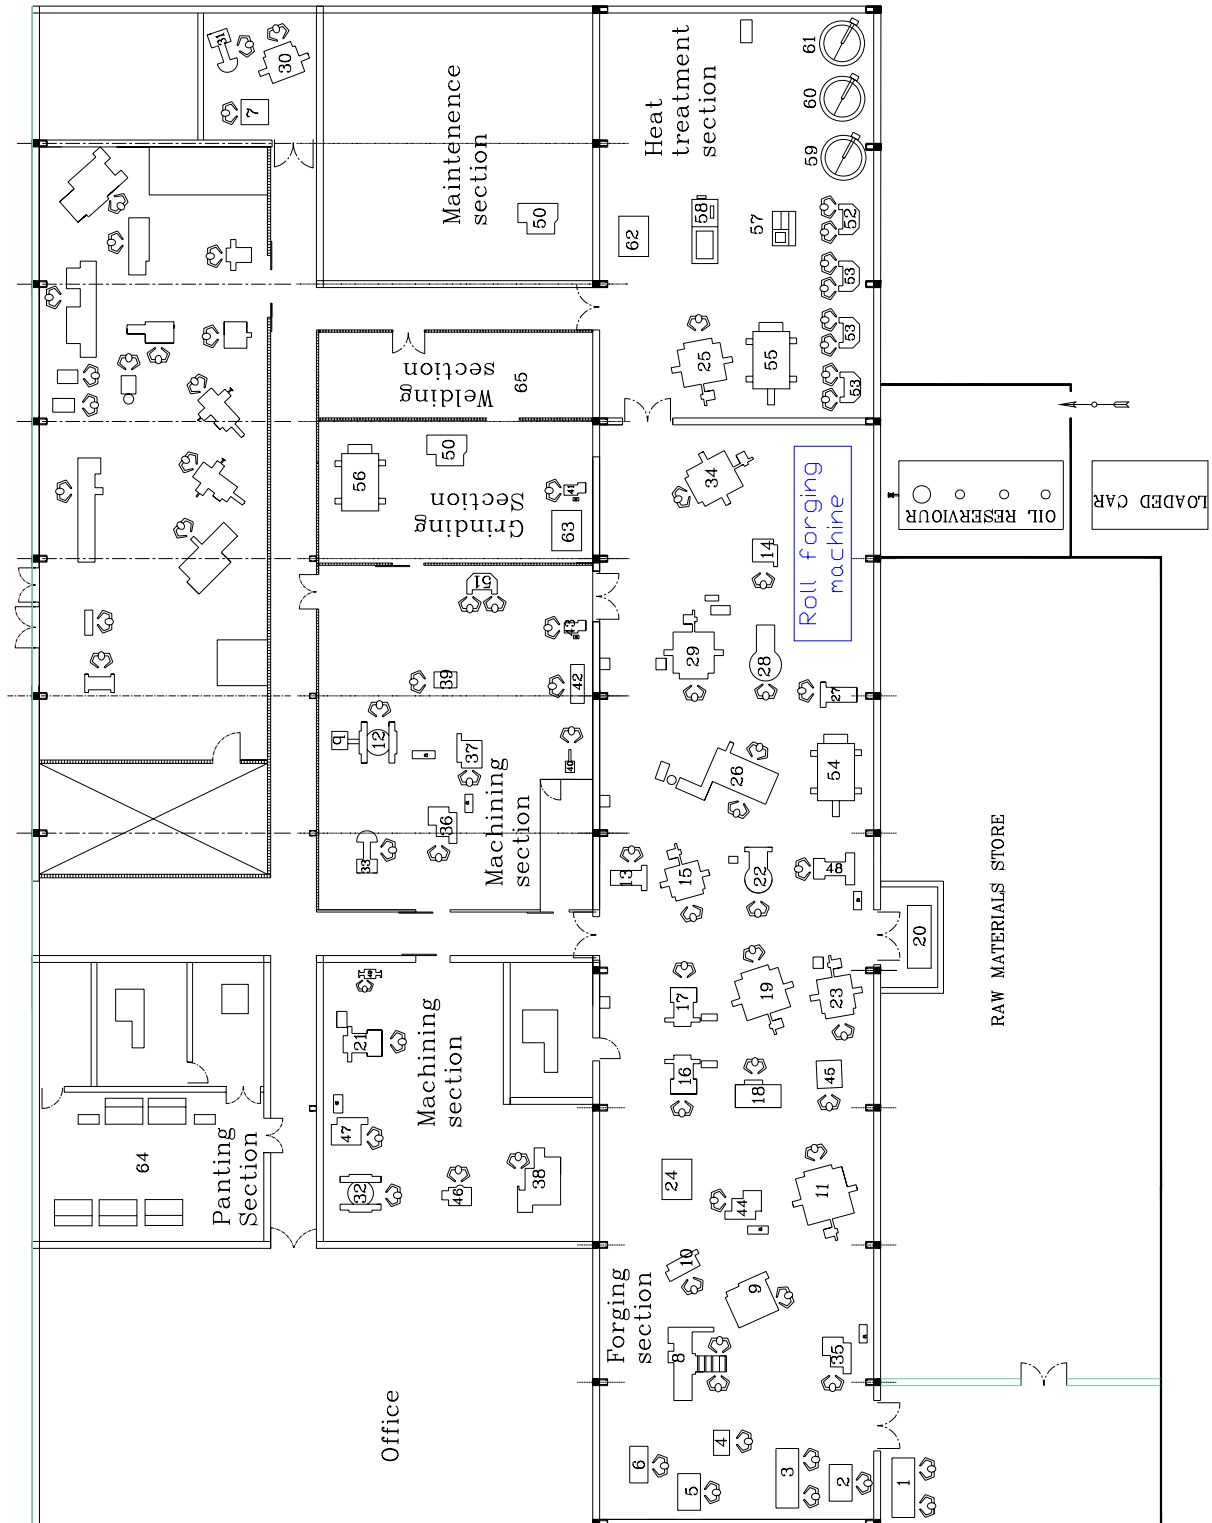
Improved Layout of Tools Factory Including Roll Forging
